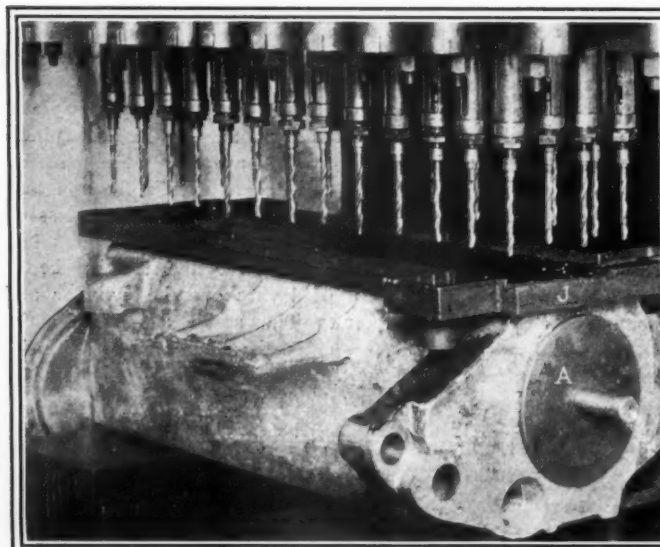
Jig J, for drilling base of Marmon crankcase, this jig being located upon an arbor occupying the crankshaft position
